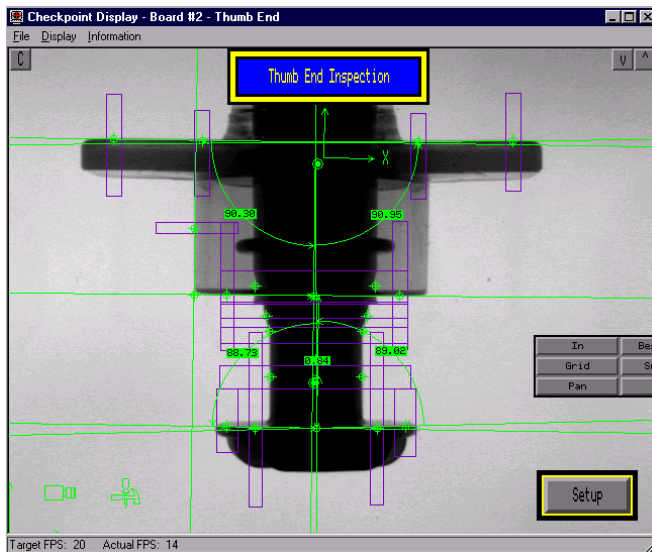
Sample Image of Thumb End Vision Inspection Tools
